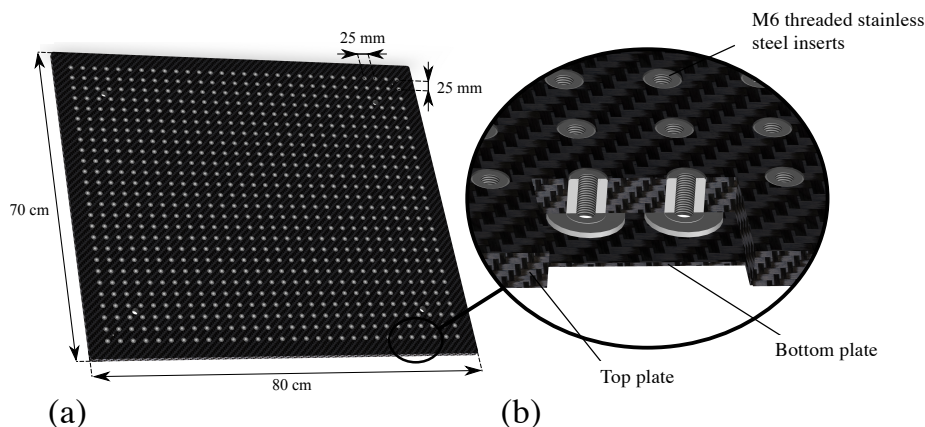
Carbon fiber-reinforced polymer breadboard - (a) Overall view of the board. (b) Cross-sectional view of the inserts.
